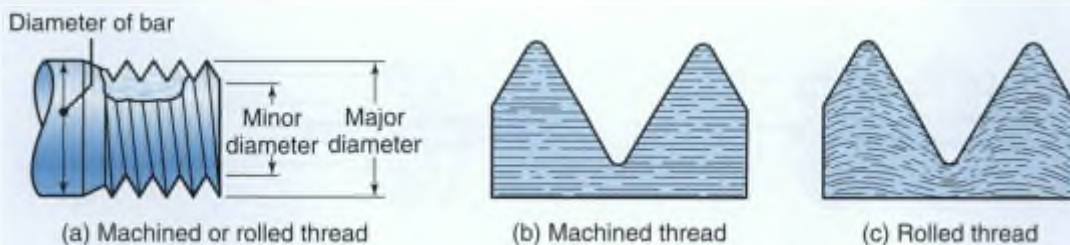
(a) Features of a machined or rolled thread. Grain flow in (b) machined and (c) rolled threads. Unlike machining, which cuts through the grains of the metal, the rolling of threads imparts improved strength because of cold working and favorable grain flow.
